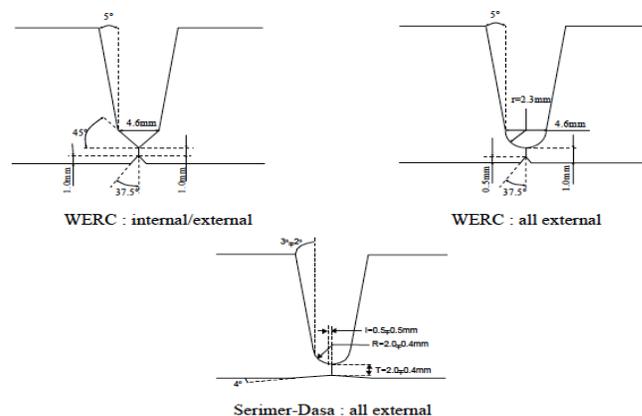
Narrow-gap weld preparations for welding procedure development and typical of girth welding preparations for field welding of X100
